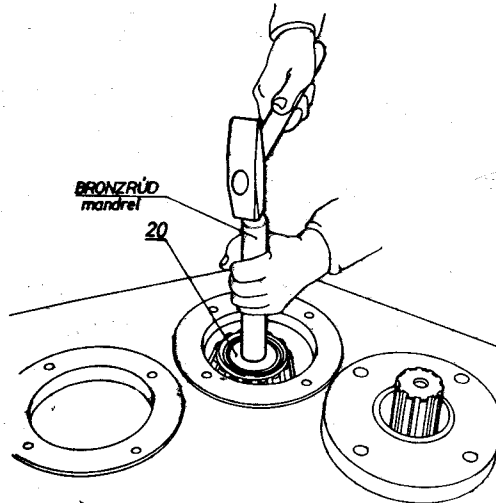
illustrates removal of taper roller bearing inner ring by means of puller, while Fig. 59. that of intermediate shaft (20) by driving out.
